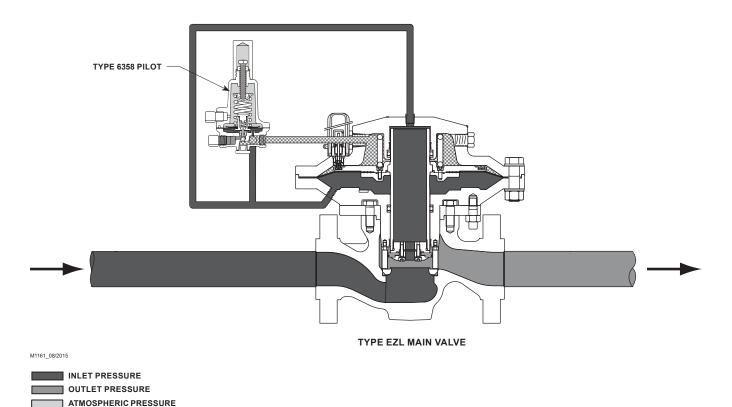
Type EZL Relief Valve or Backpressure Regulator
